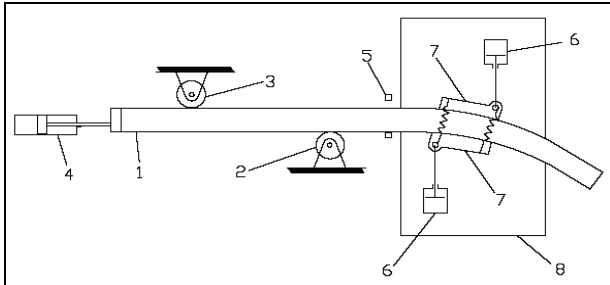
Mechanism for hot incremental tube bending according to patent Nakamura Terisige: (1) Tube, (2,3) Sideward rollers, (4) Hydraulic support, (5) Induction heater, (6) Moment hydraulic cylinder, (7) Lever.
